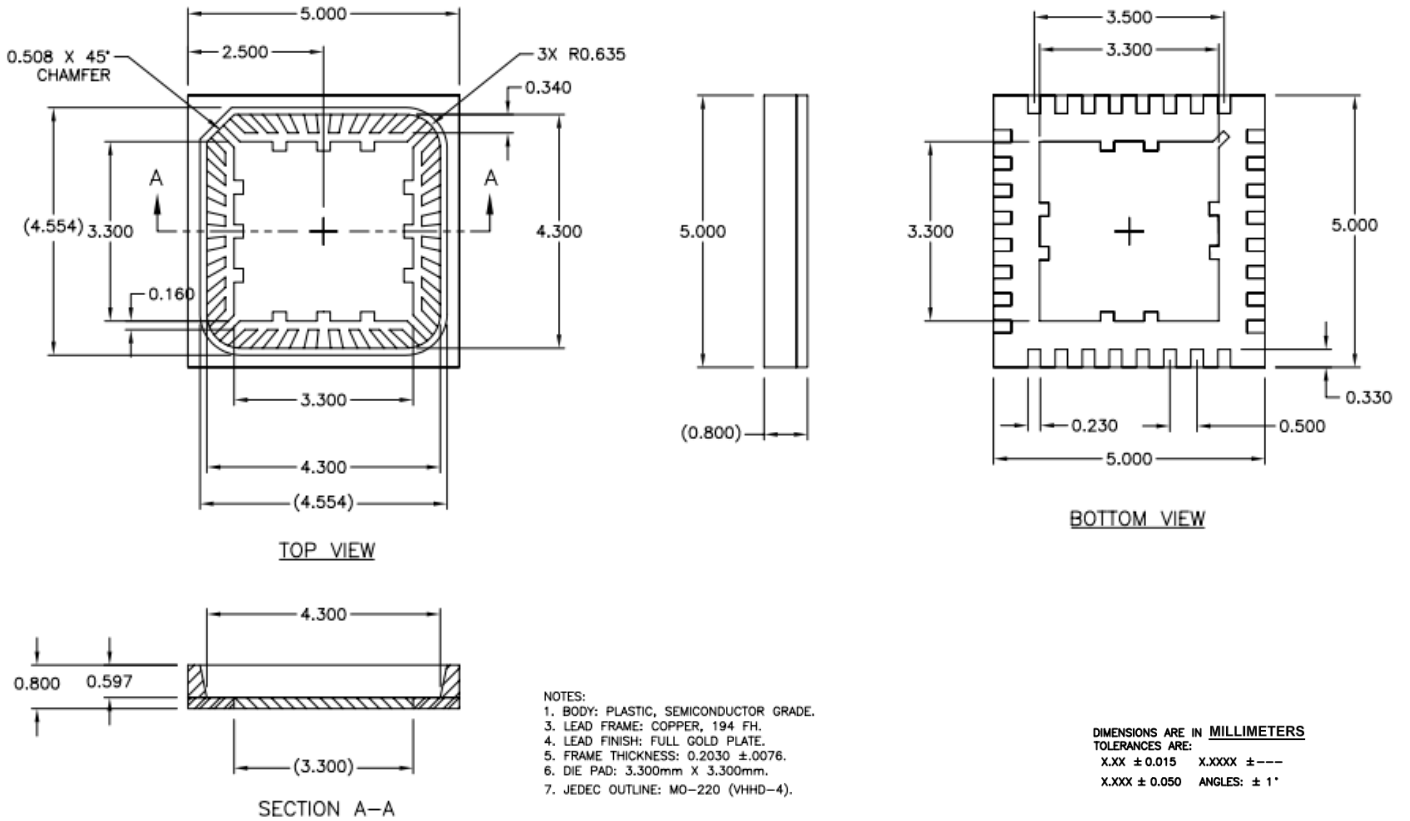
32-Lead Lead Frame Chip Scale Package [QFN]
